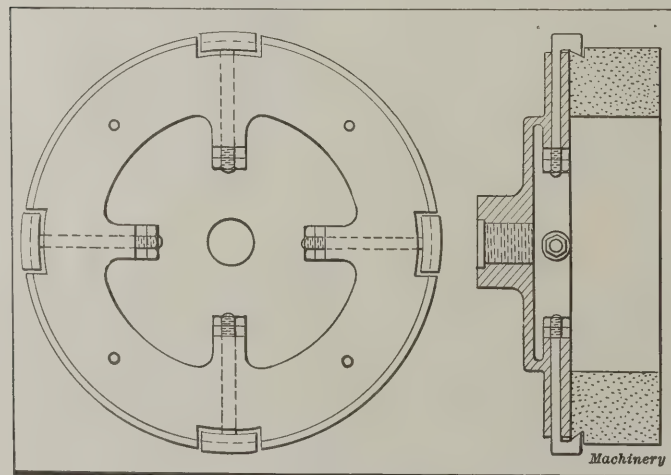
Faceplate and Chuck-jaws for Holding Grinding Wheel
